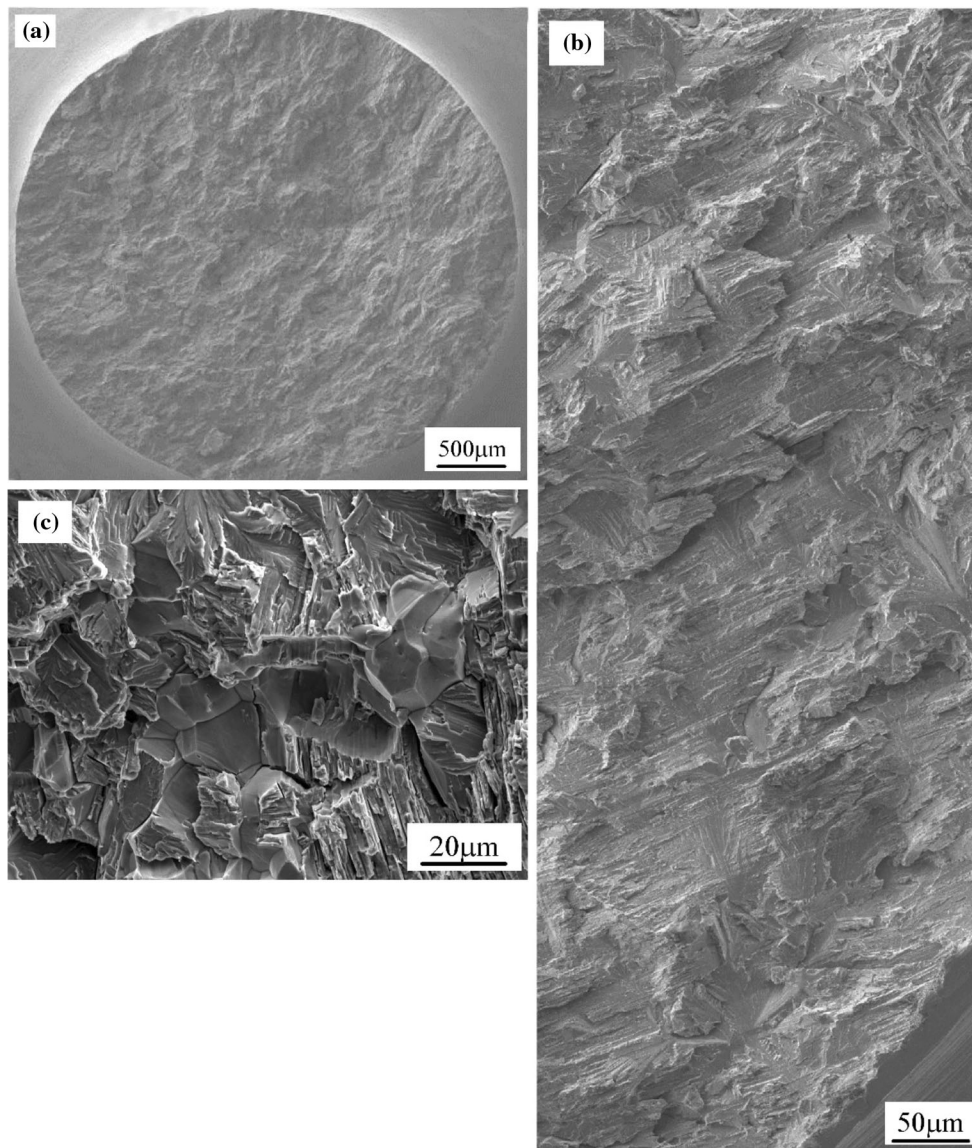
Fracture surface of TiAl alloys with 0.85 μm of notch radius
